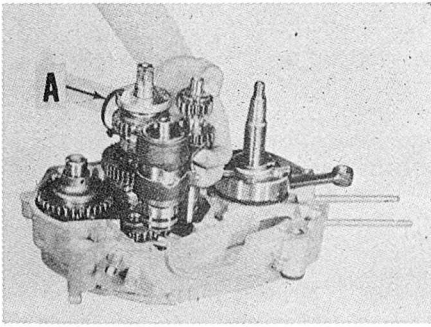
A special gear holding tool (A) is available to aid in transmission installation.
